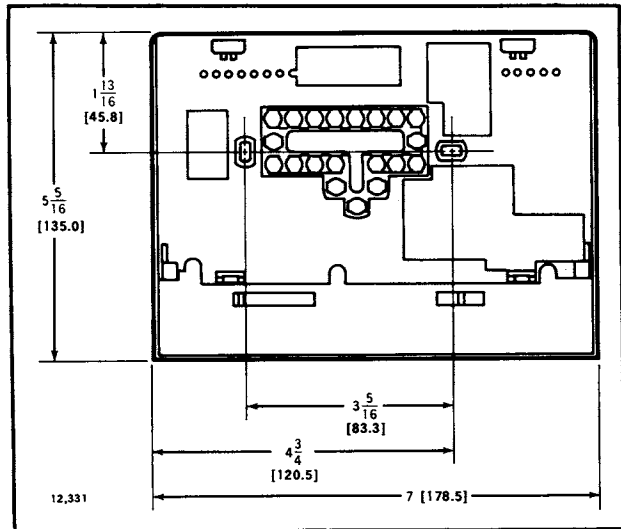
T8611G,R SUBBASE MOUNTING DIMENSIONS IN in. [mm IN BRACKETS].
